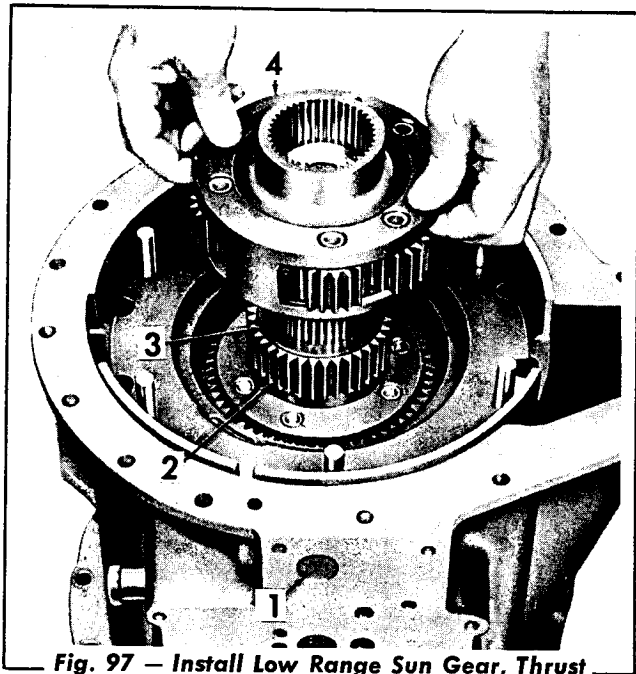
Install Low Range Sun Gear, Thrust Washer and Planetary Carrier Assembly
